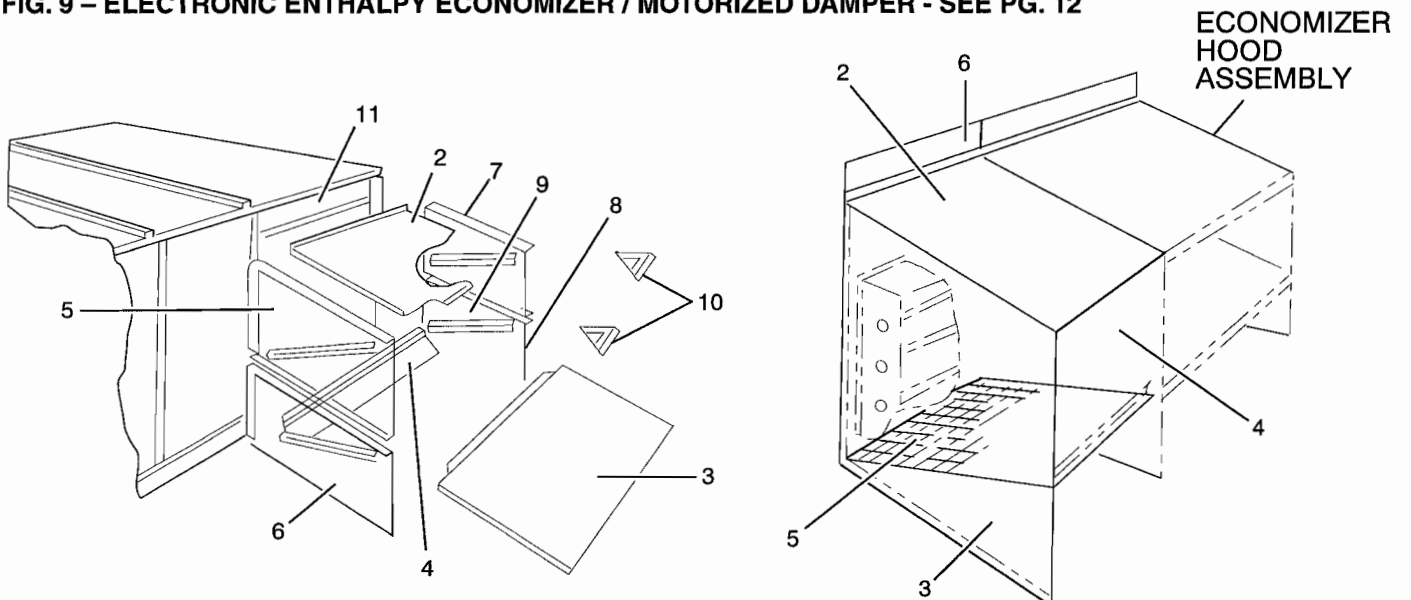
ECONOMIZER / MOTORIZED DAMPER RAIN HOOD ASSEMBLY (ITEM 1) - SEE PG. 13
